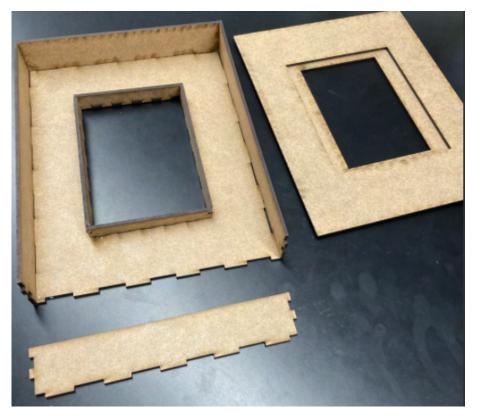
Photo of the laser cut HDF showing the parts being not completely assembled
